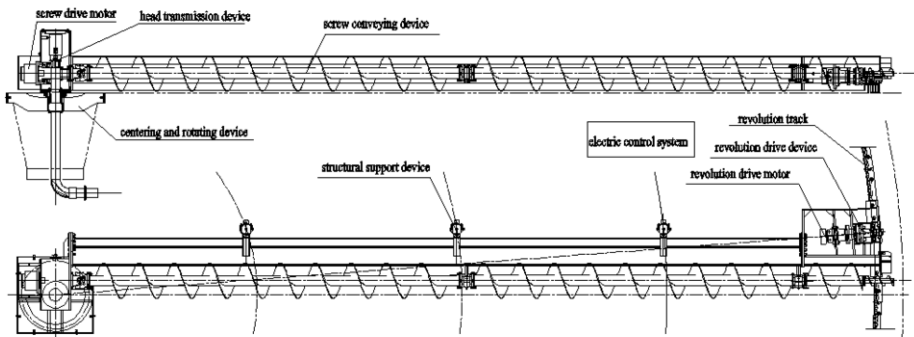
The structure of the fully hydraulically driven intelligent screw clearing machine.
